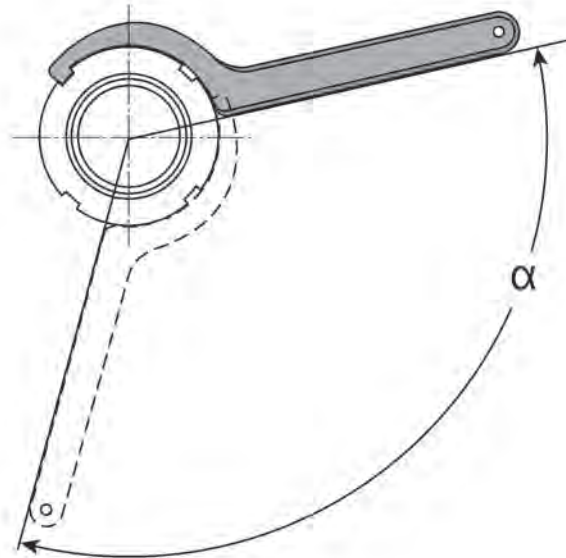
Mounting a Self-Aligning Ball Bearing on an Adapter Sleeve
